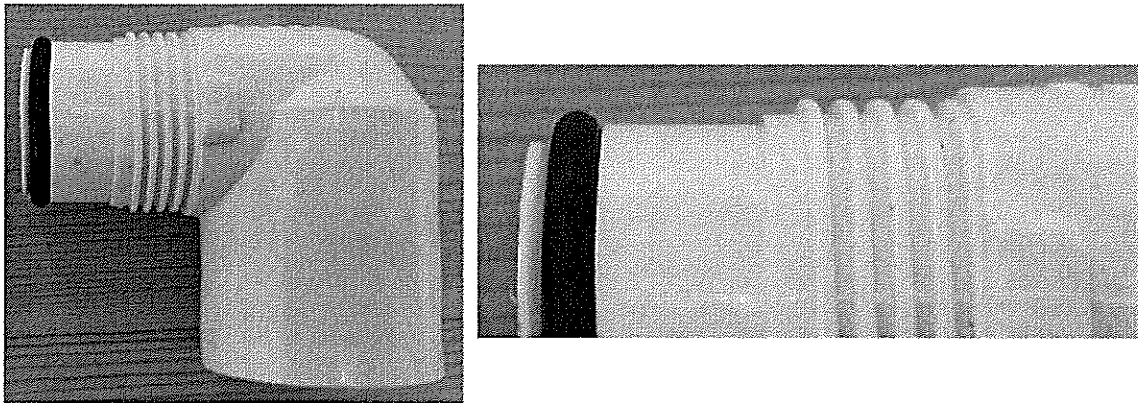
(left) ACME threaded fitting. (right) ACME fitting — flat apex and valley thread configuration with O-ring.
